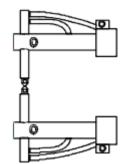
THI 50 Digit resistance spot welding machine.
